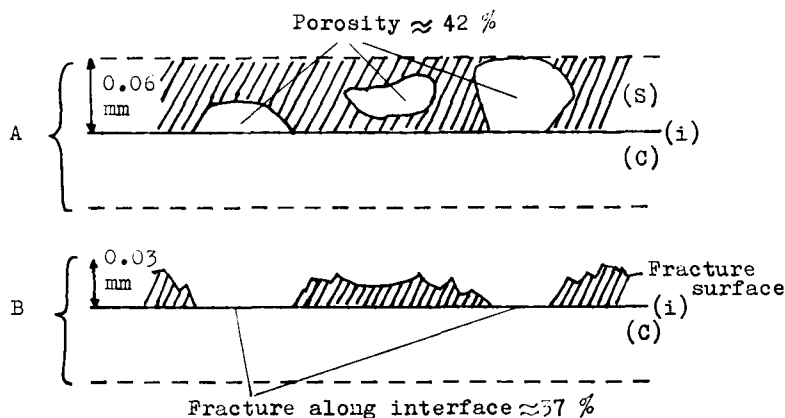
A casting/solder interface zone (A) before fracture and (B) after fracture. The purpose of the drawing is to demonstrate a possible interpretation of the agreement between porosity and fracture localization. S = solder; C = casting; i = casting/solder interface. The mean pore size is 0.06 mm, and 0.03 mm is the distance within which the fracture occurred.
